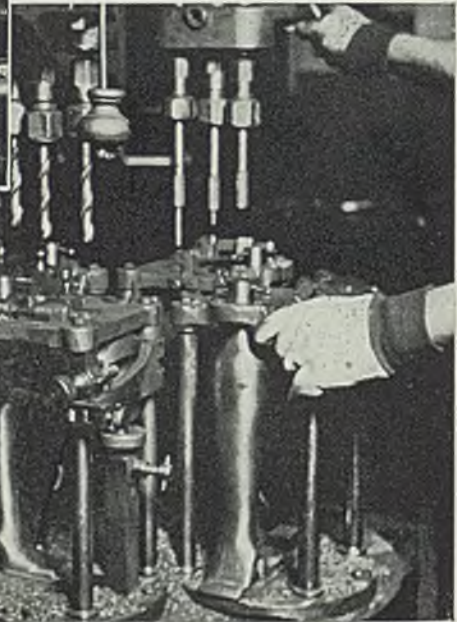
(above) Boring holes for the upper shaft in a rotary sewing machine. Fig. 3—(right) Three-station operation for drilling, reaming and counterboring
